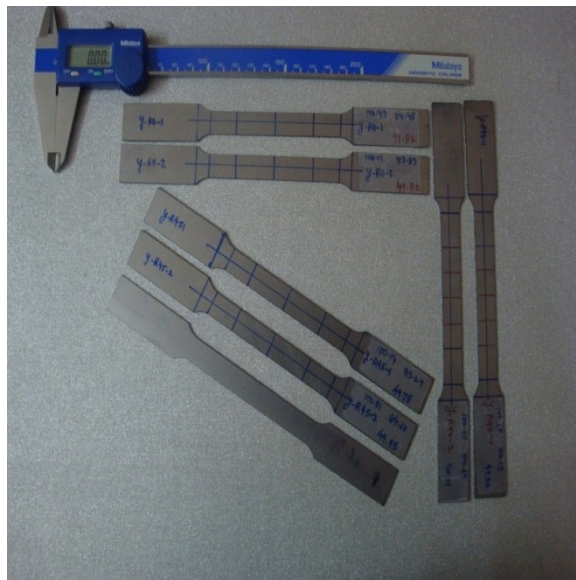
Tensile test specimens in 0°, 45° and 90° to rolling direction as per ASTM E8M standard.
